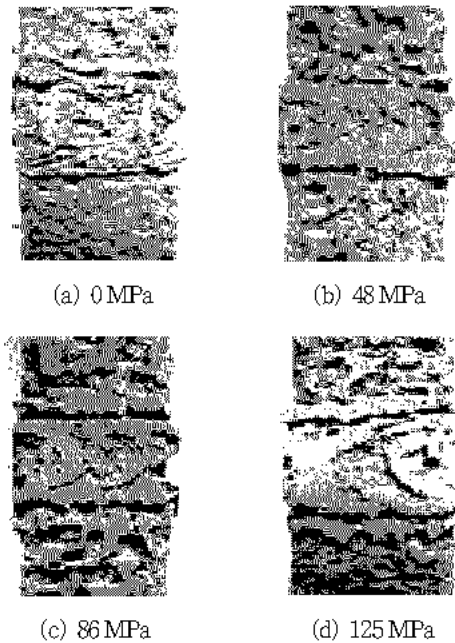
Corrosion pattern of welded zone(×2)
